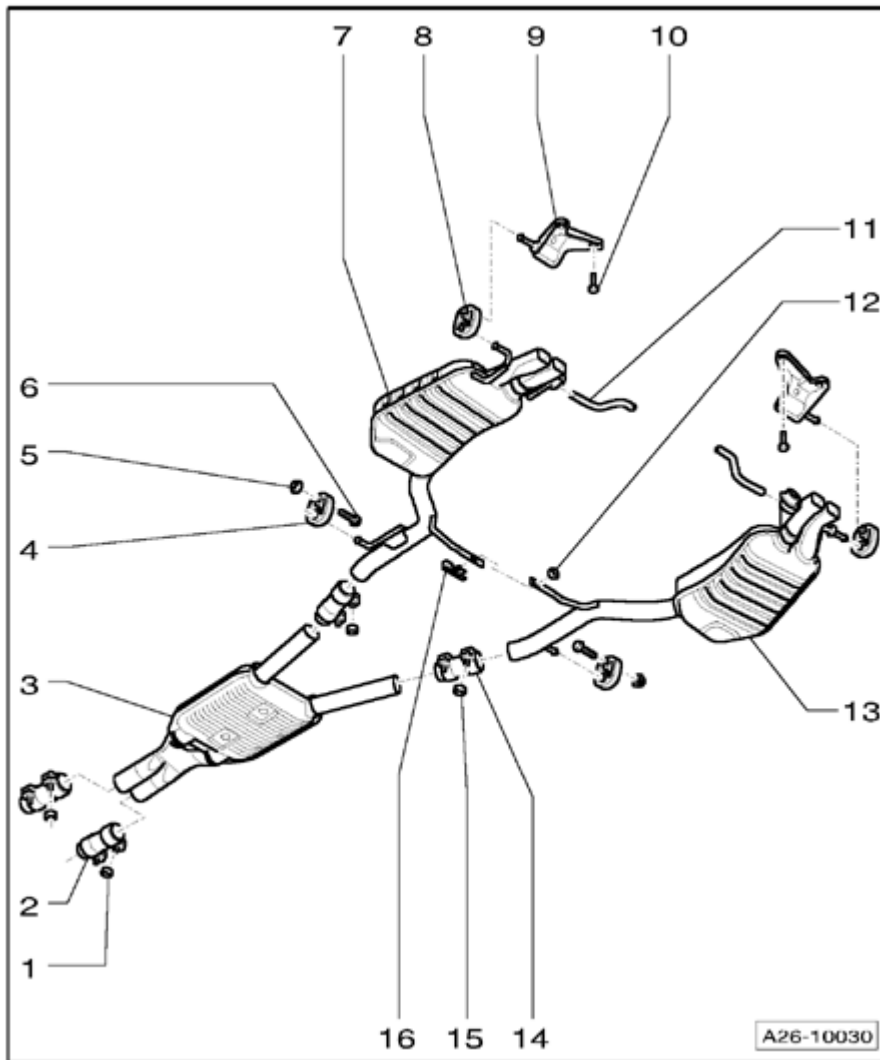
Enter Muffler And Rear Muffler Remove/Install Components
